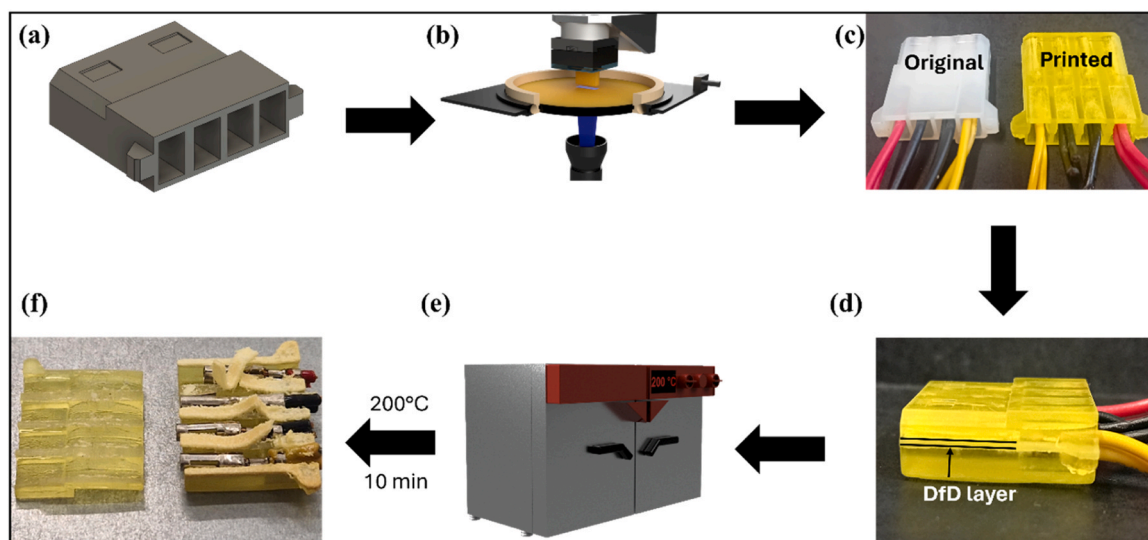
Scheme of the DfD process. A component can be created via CAD, processed by 3D printing, and then disassembled through an external impulse. No additional mechanical force was needed to separate the part. (a) CAD designed part; (b) manufacturing process; (c) original object (left) and printed object (right); (d) integrated disassembly layer; (e) heat treatment for 10 min at 200 °C (f) dismantled part.
